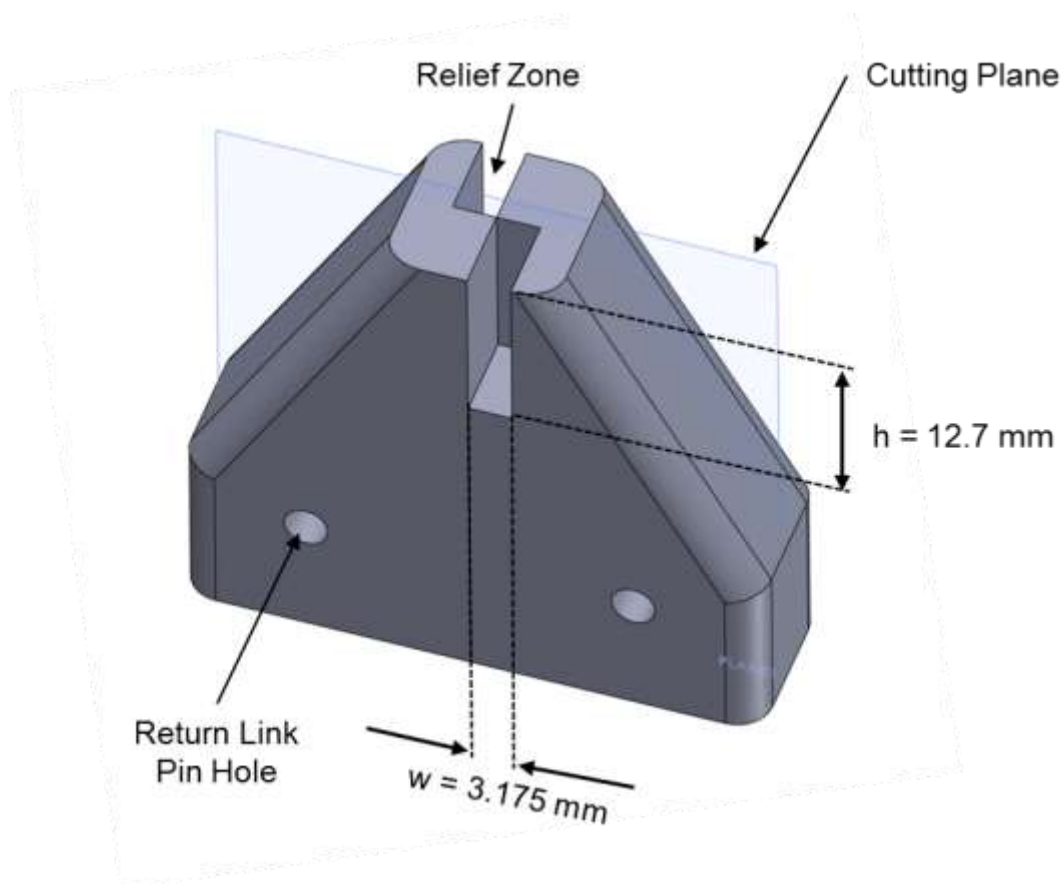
Cutting blade geometry shown in the blade closed position.
